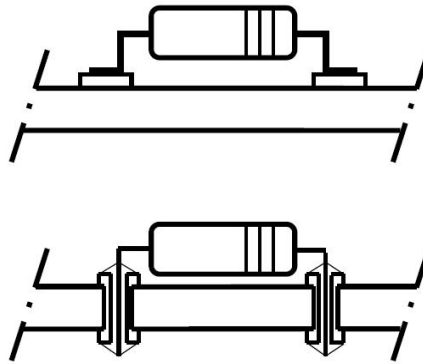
The two main printed circuit board technologies in use. A surface mount component above, and a through-hole component below.
